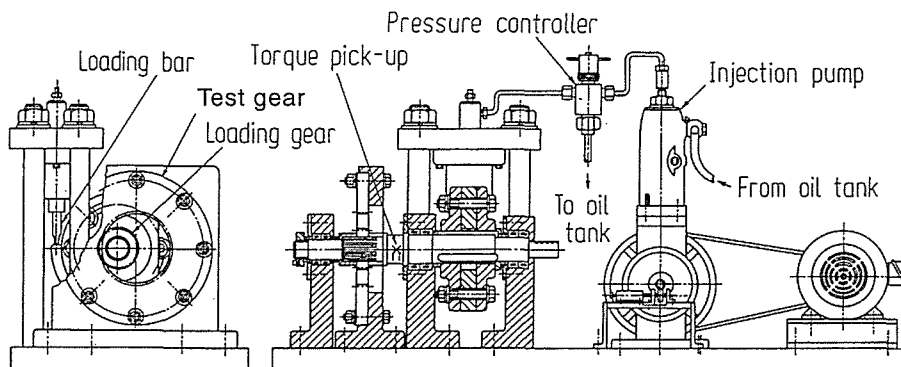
Static loading and bending fatigue testing machine for internal gear
